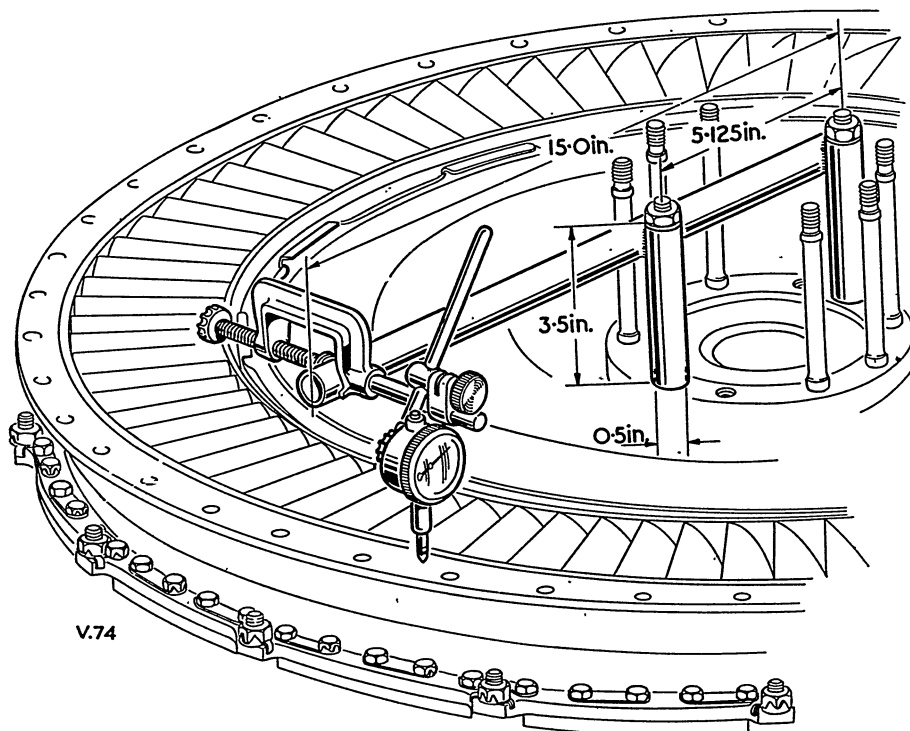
Using locally-made tool to check the alignment of the nozzle ring assembly
